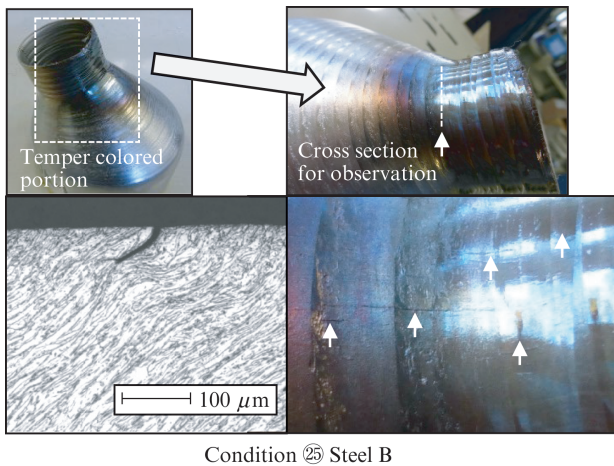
Fine clack defect at surface of eccentric and oblique axis spinning formed specimen
